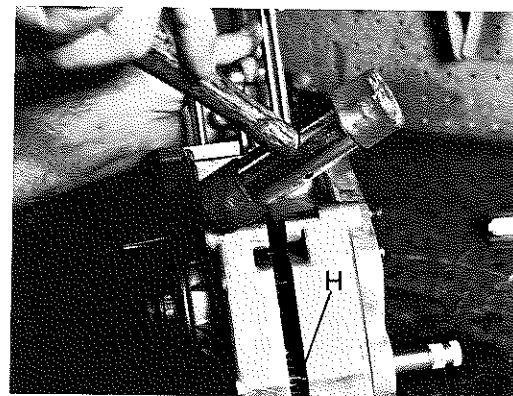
Removing shaft collar from countershaft. Fig. 47 Method of separating crankcase halves. Note (H) crankcase alignment dowel.
